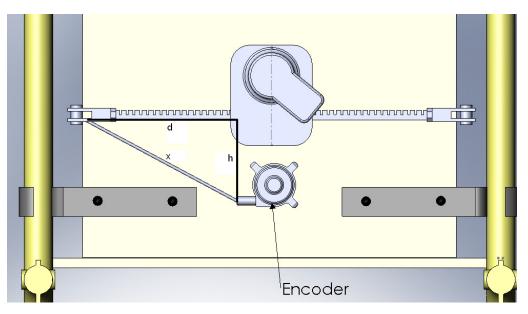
MOUNTING OF THE LINEAR ENCODER
